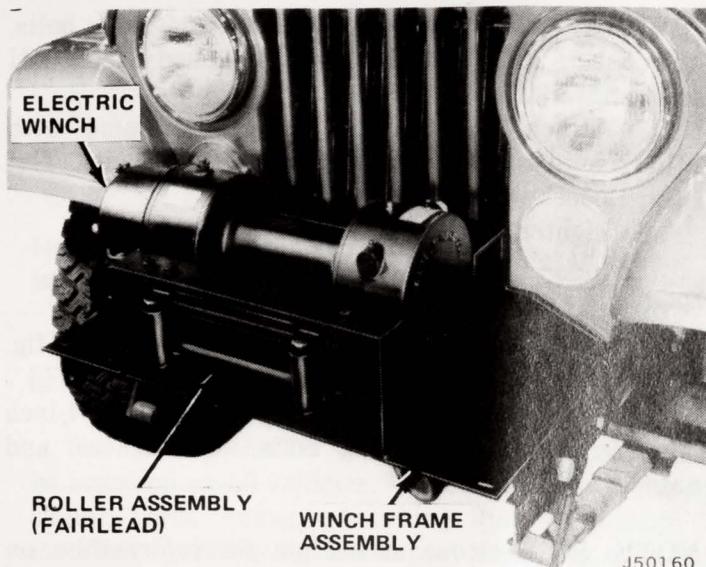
Ramsey Electric Winch and Frame Assembly Installed
